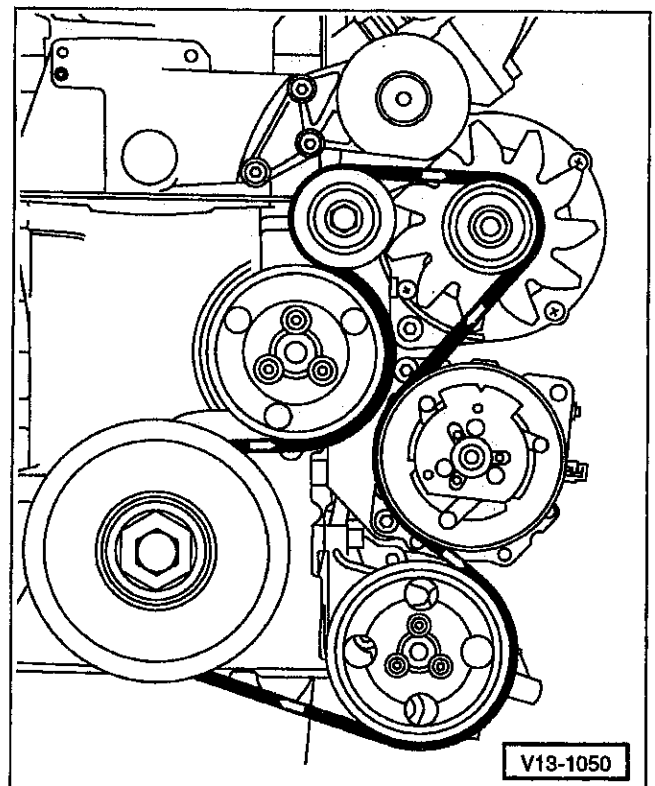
Poly-ribbed belt routing on 6-cylinder engine. Arrows indicate direction of travel.
